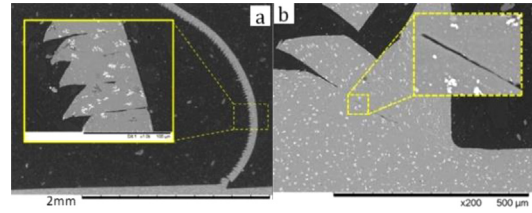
serrated chips showing localized deformation and shear fracture as the main mechanisms within the primary deformation zone and ahead of the cutting tool (a) at $V_c = 30\text{m/min}$ and (b) $V_c = 2\text{m/min}$.
